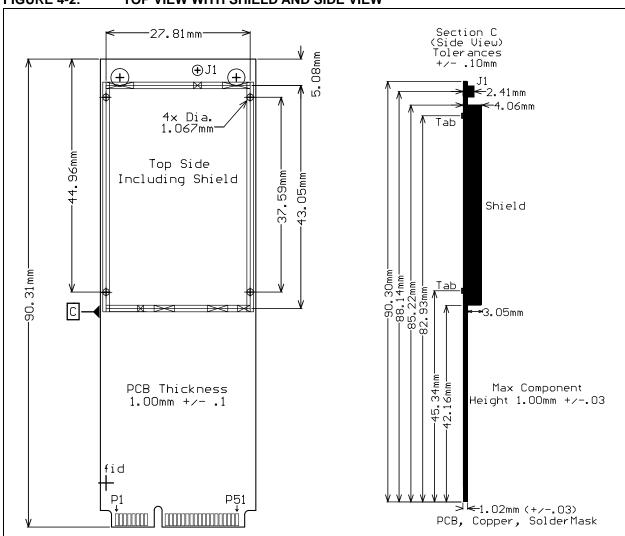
TOP VIEW WITH SHIELD AND SIDE VIEW
